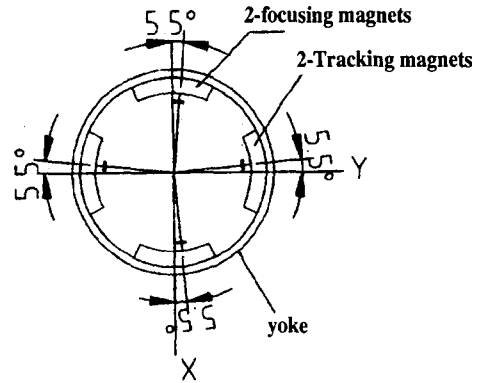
Magnets, Yoke and Steel Plates with Offset Angles: Top View
